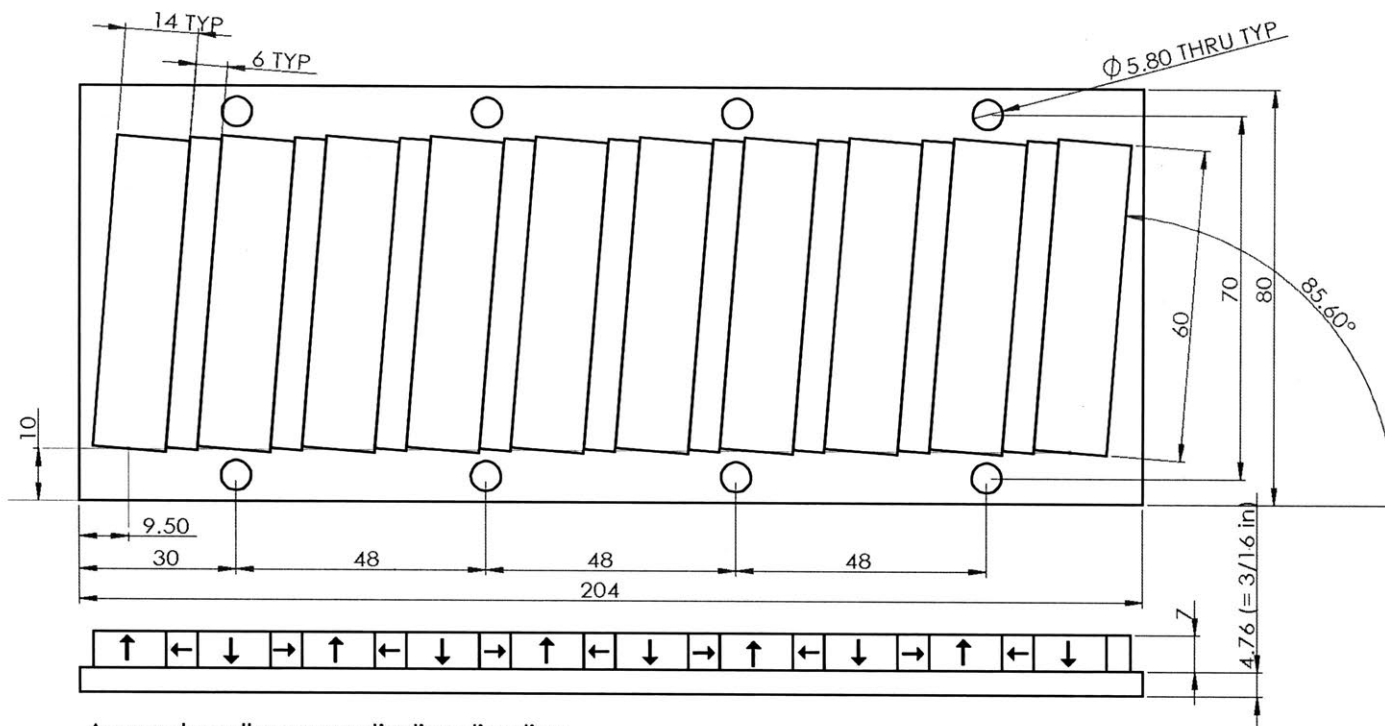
Drawing of the skewed magnet track of our new fine-tooth motor. Short version used in the single-sided motor configuration.
